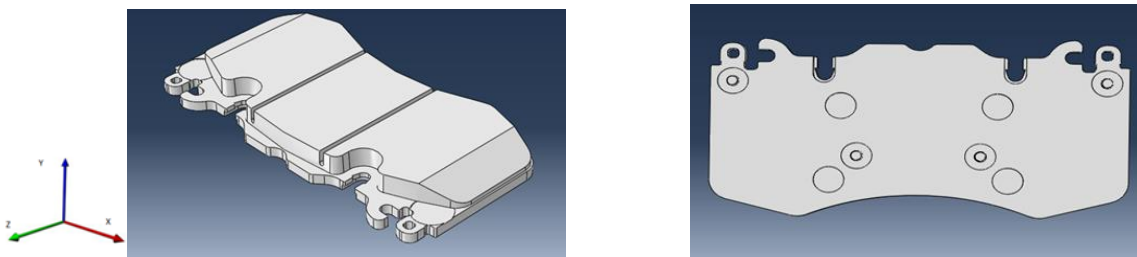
The 3D model of assembled brake pad-B in different schematic views.
